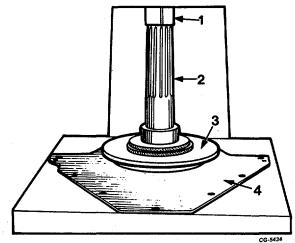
Pressing Rear Oil Seal into Retaining Plate Using SE-1905 Installer with 5-1/4 " O.D. Adapter
